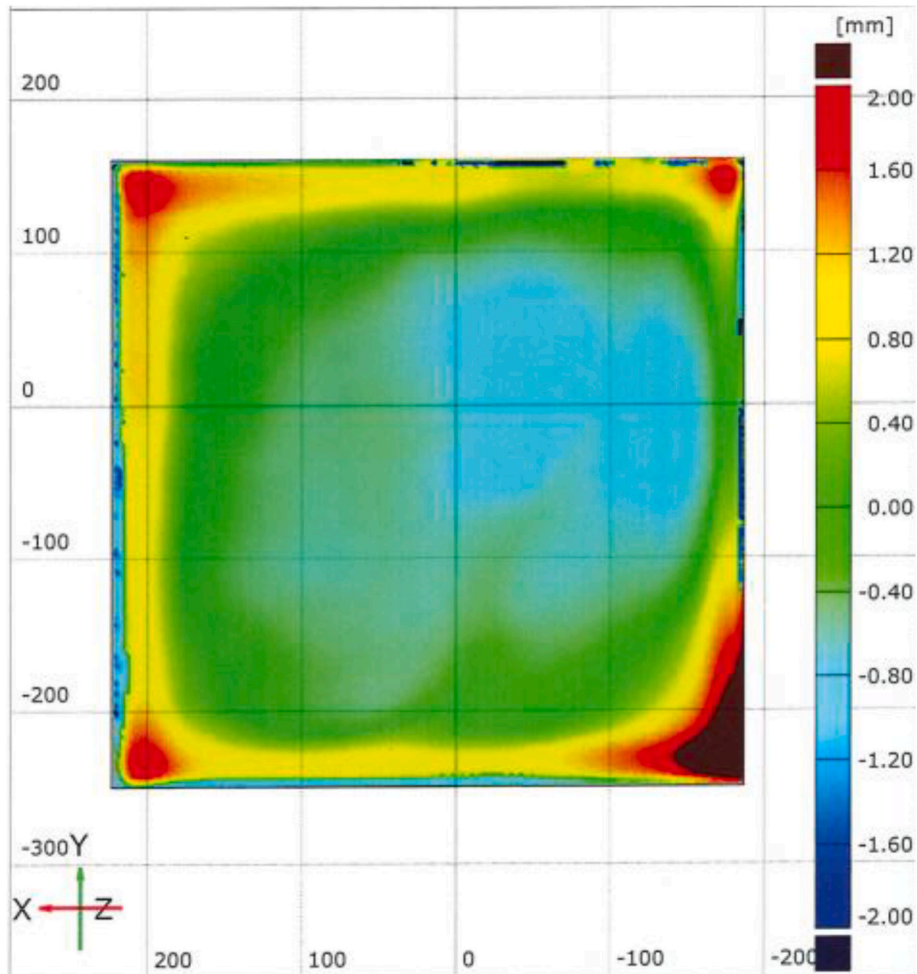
Dimensional control (flatness) of the explosive-clad plate
